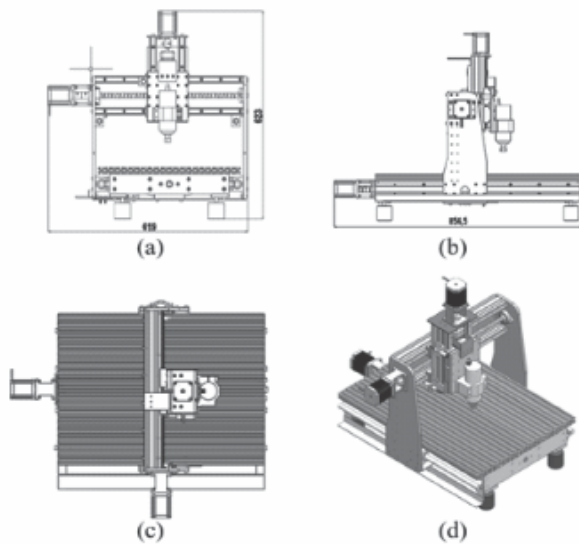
The mechanical design of mini CNC milling machine: (a) front view, (b) left view, (c) top view, (d) isometric view
